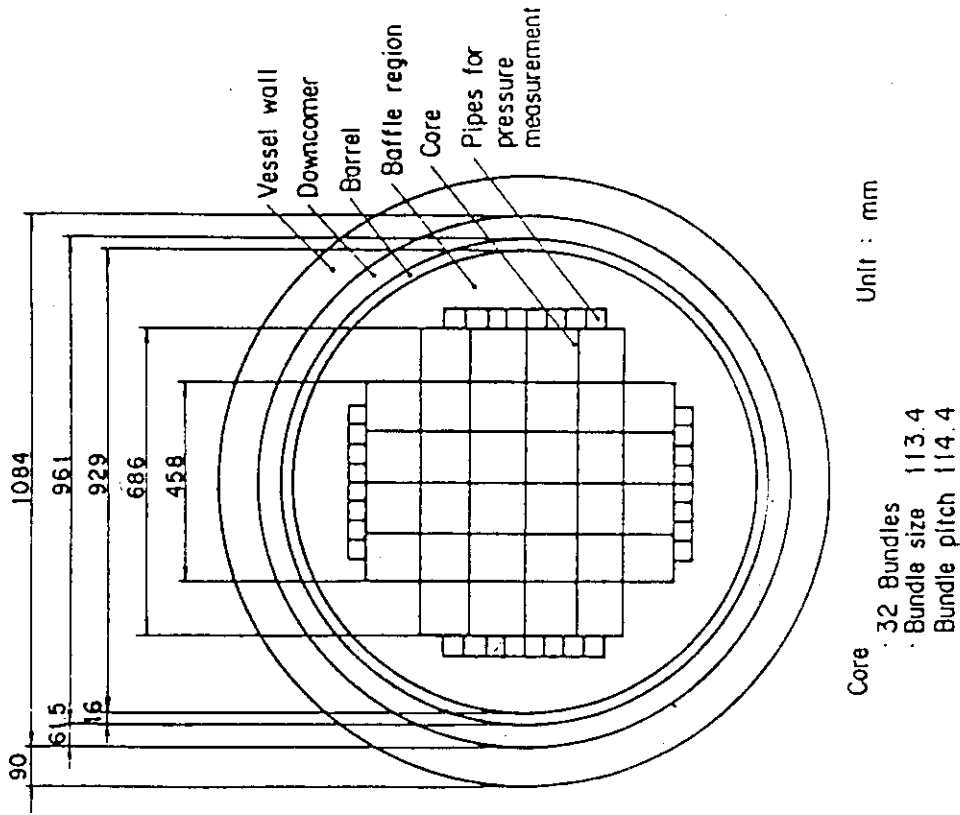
Dimension of CCTF Core-II pressure vessel cross section
